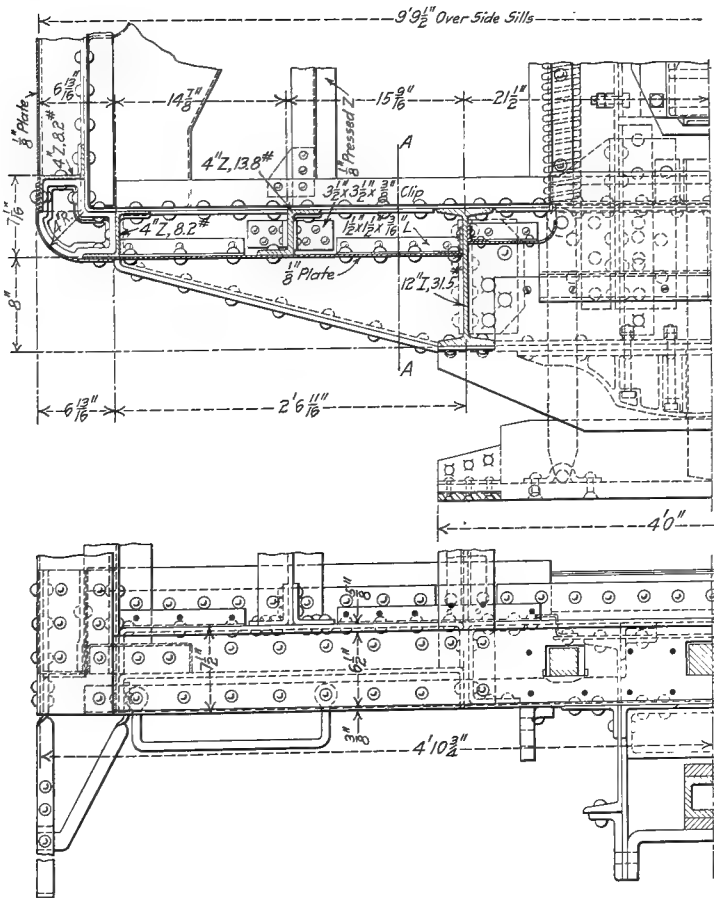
End Sill of the Burlington Dining Car Shown in Figs. 400-403. Builder, The Pullman Company.
